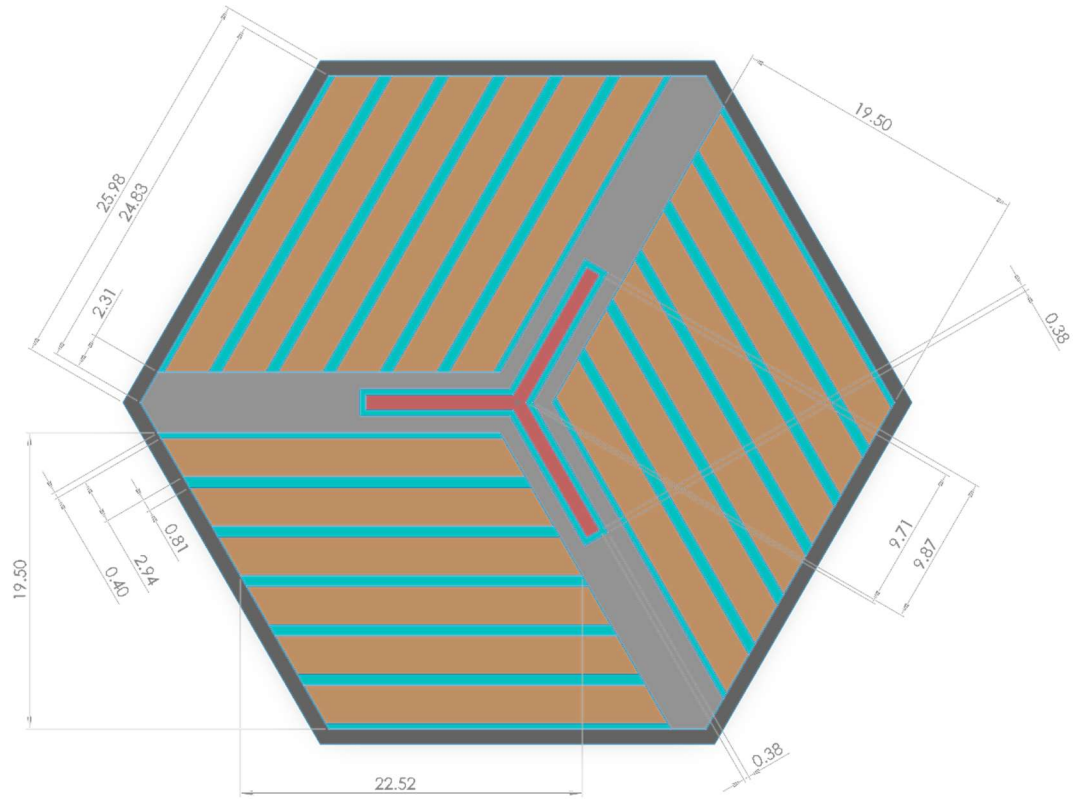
AHTR fuel assembly derived dimensions. (Varma, et al., 2012)
